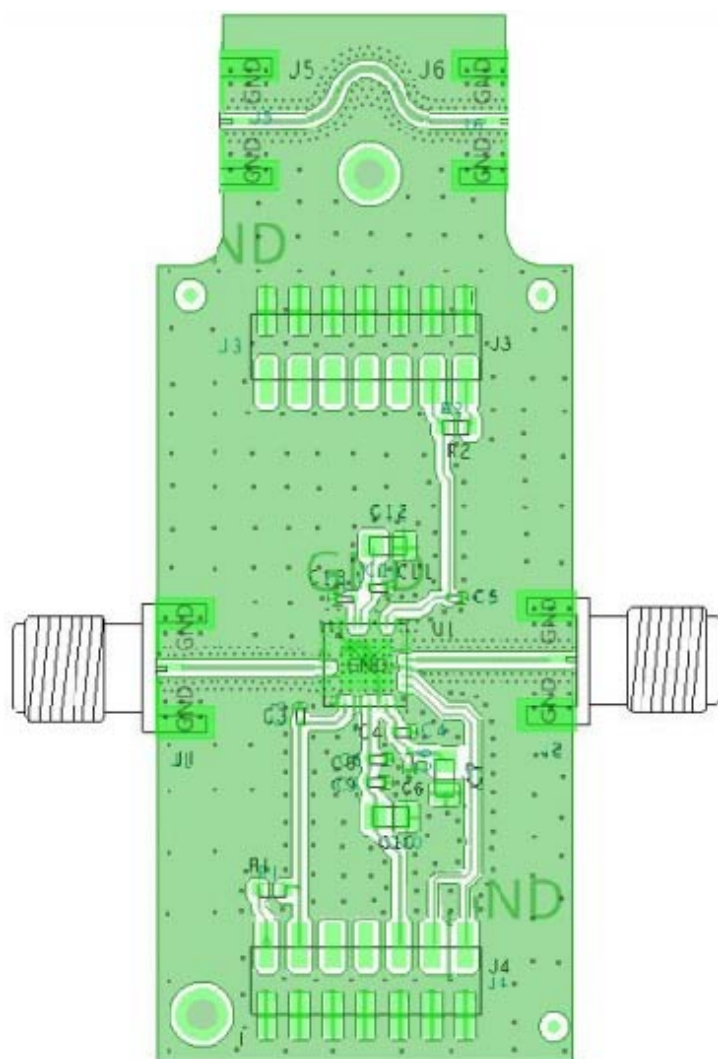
ADPA9007-EVALZ Assembly Drawing (J5 and J6 Are Not Installed)
